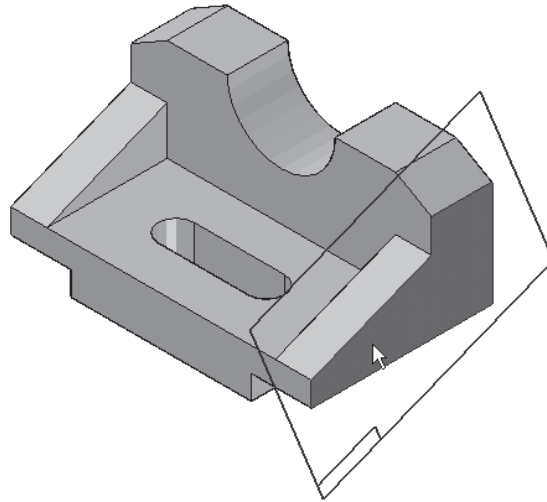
Preview of the reference plane after reversing the positive X axis direction
